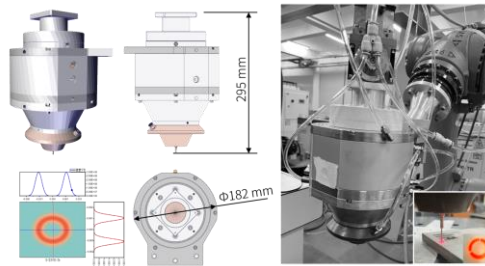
Coaxial annular beam laser metal wire deposition processing head
